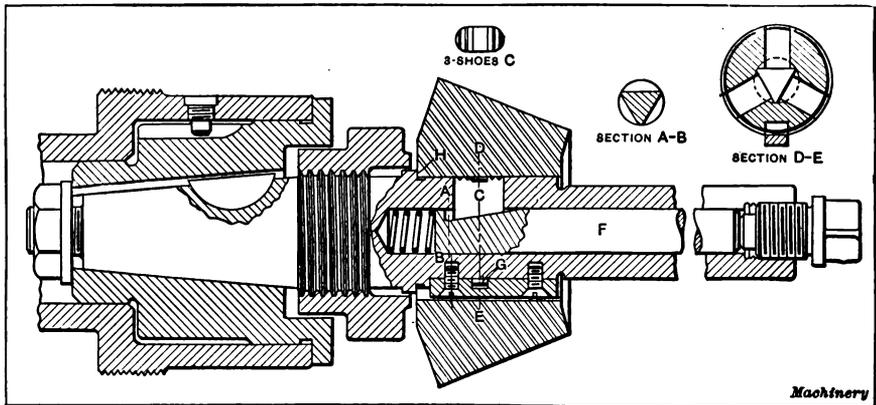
Arbor for Pinion Blanks, equipped with Three Expanding Shoes
